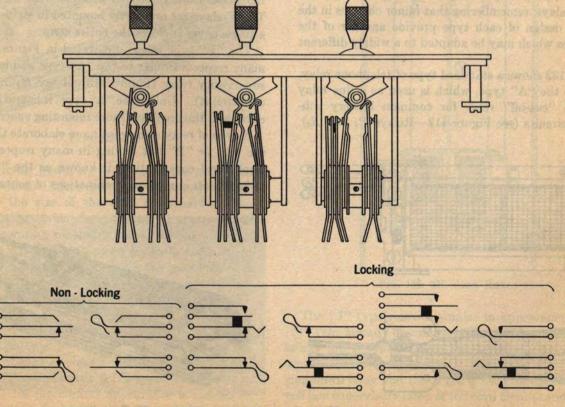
STANDARD SWITCHBOARD KEY ASSEMBLY
